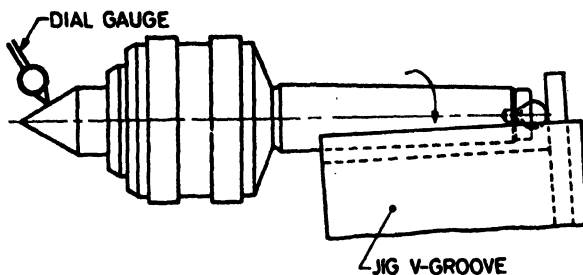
ARRANGEMENT FOR TESTING ALIGNMENT OF CENTRE WITH TAPER SHANK
